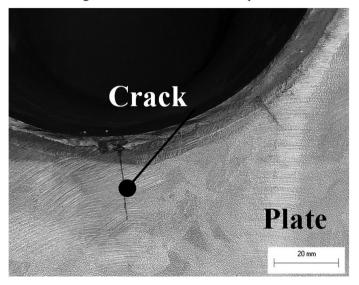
Fracture of circumferential weld between the tube and plate.
